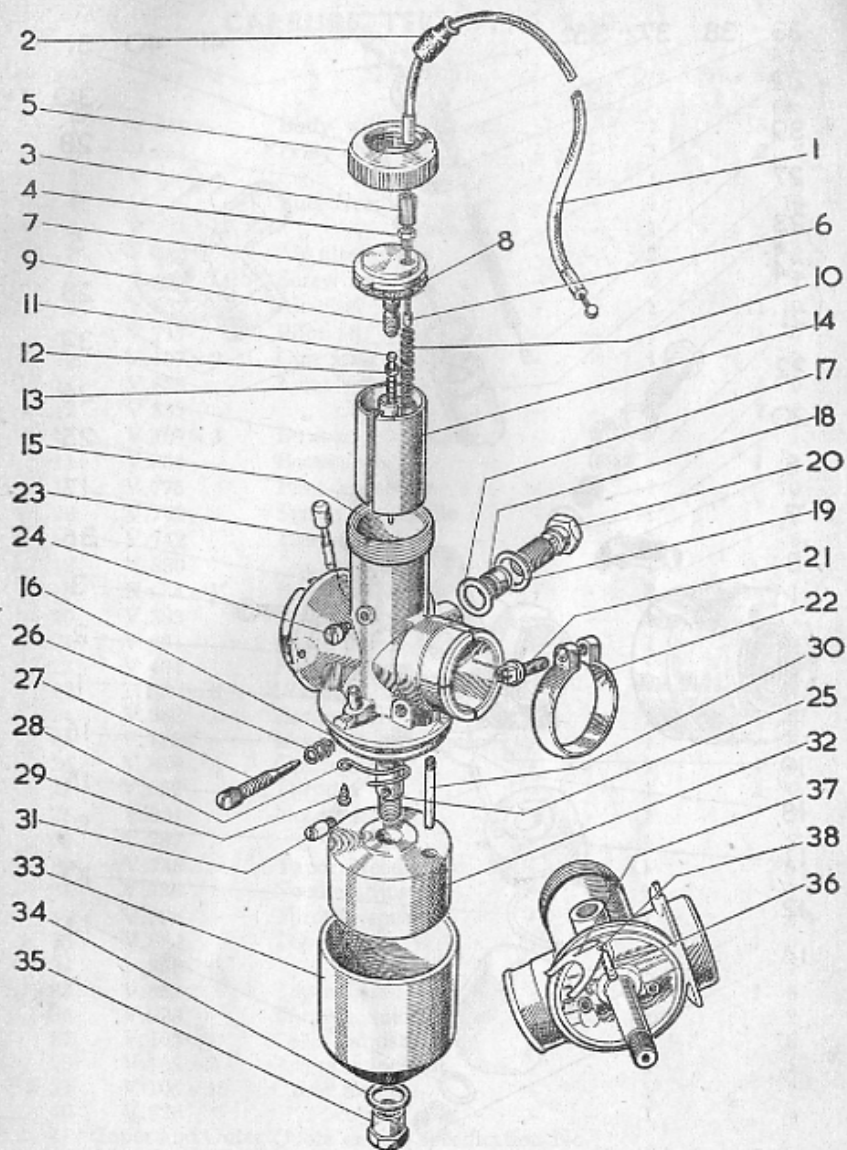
CARBURETTER, TYPE S.25 PARTS.
